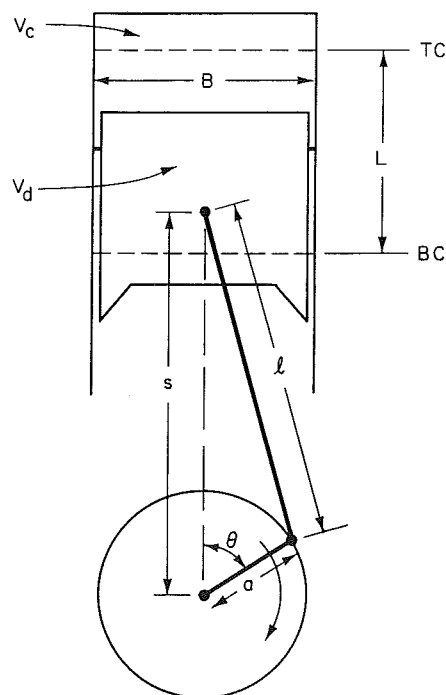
Basic geometry of the reciprocating internal combustion engine. V_c and V_d indicate clearance and displaced volumes. B = bore, L = stroke, θ = crank angle, h = clearance height, l = connecting rod length, s = wrist pin axis to crank axis distance.
